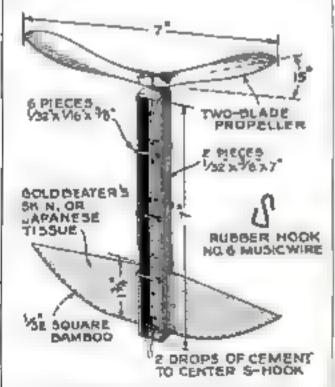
How to mount the revolving propeller (upper view), the completed model (lower-
